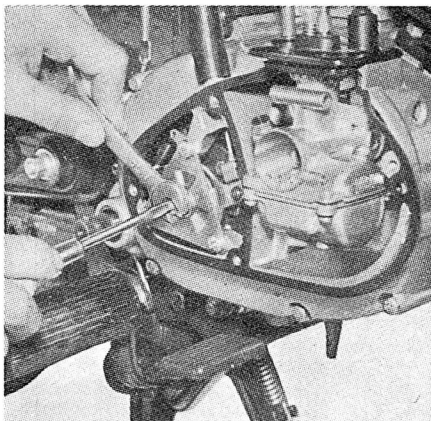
When adjusting clutch, loosen adjuster screw 1/4-turn from point of resistance.
